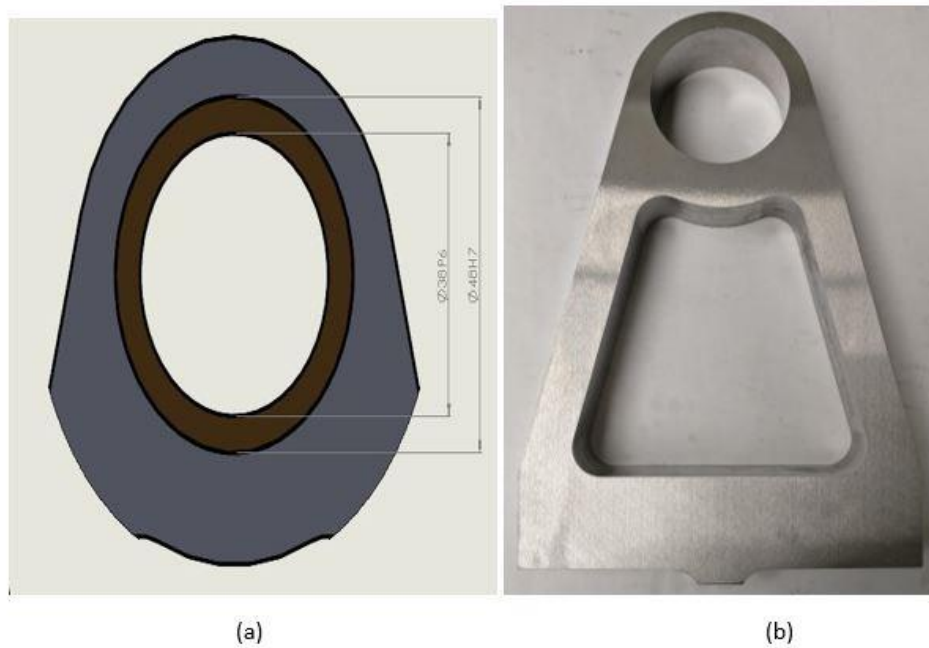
(a) Detailed view of the tolerance requirement (b) Polished and fully machined A-Pillar support.
